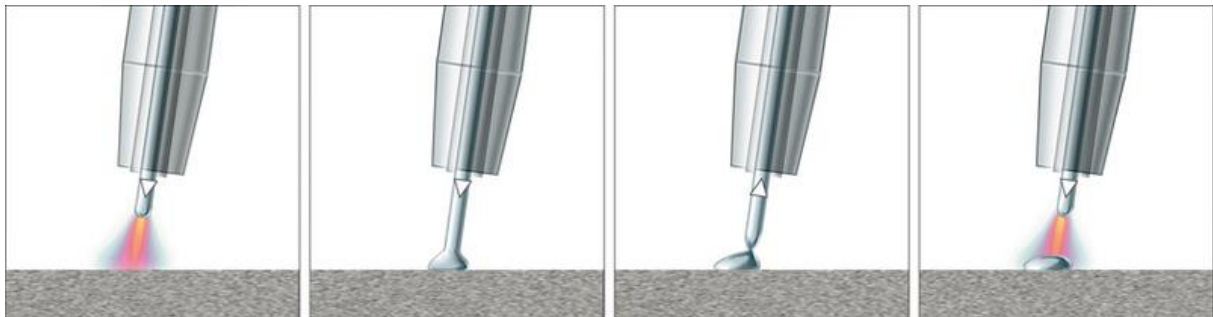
Illustration of the general CMT process. The arrows show the movement of the wire as the weld bead is deposited. Adapted from [14]
